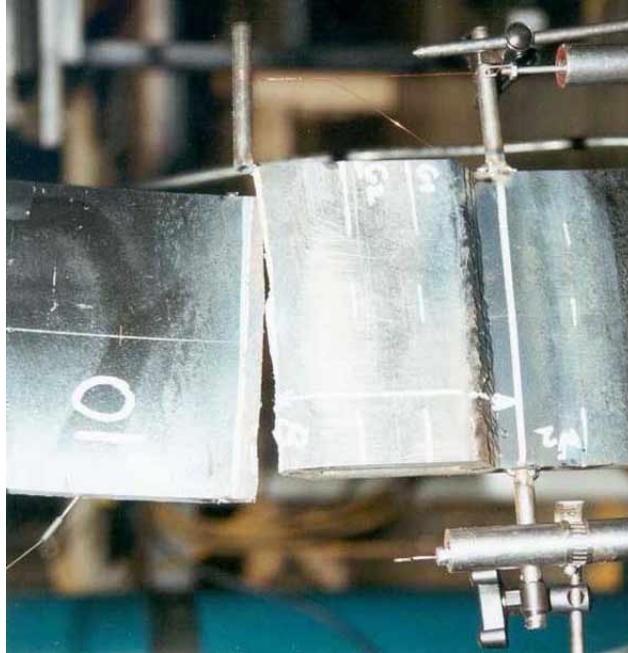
Typical Fractures of Bell and Spigot Test Coupons
